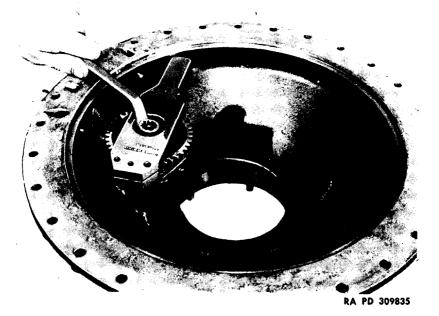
Removing Front Section Scavenge Pump Gear Nut
